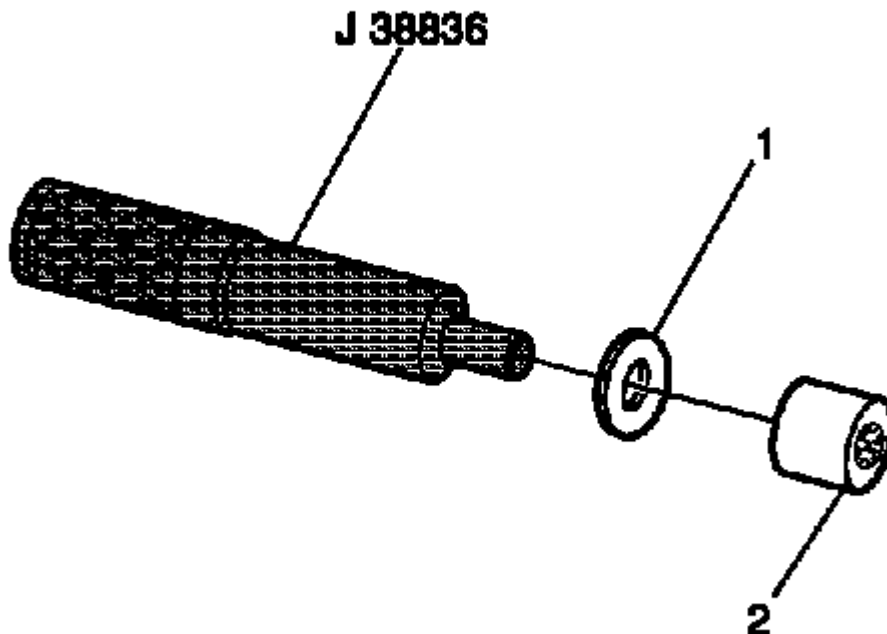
View Of J 38836, Washer & Pilot Bearing (without RPO HP2)
